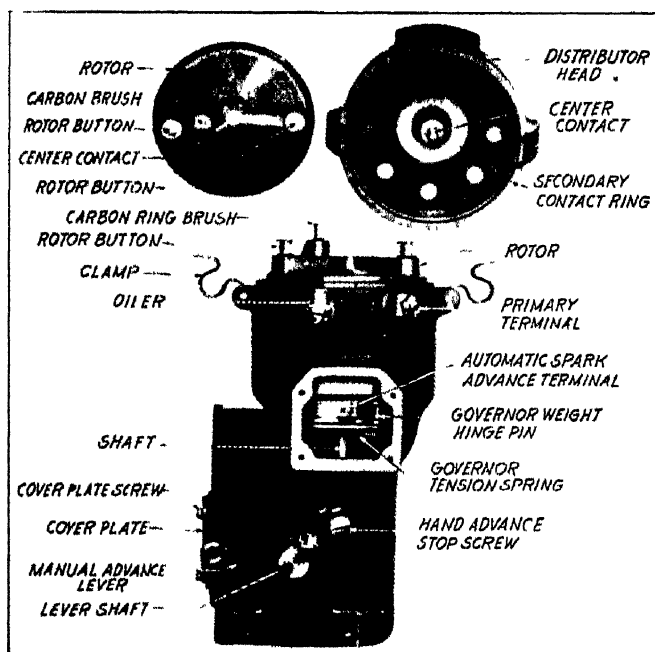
Deleco ignition unit for Lincoln Eight with distributor head removed. The special two contact rotor is shown at upper left.
